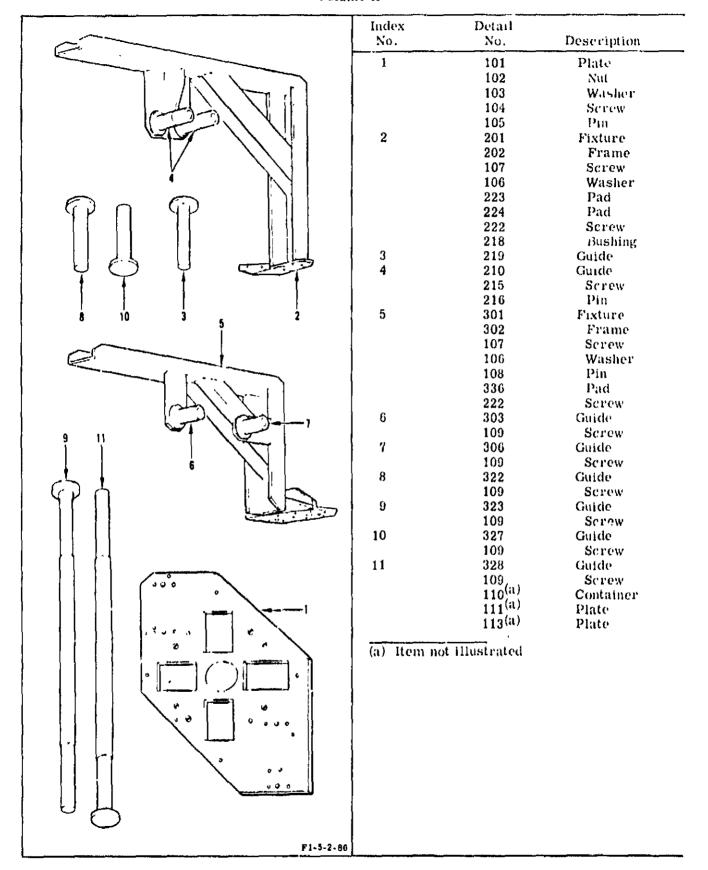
Alinement Tool and Inspection Check Fixture T-5039113
